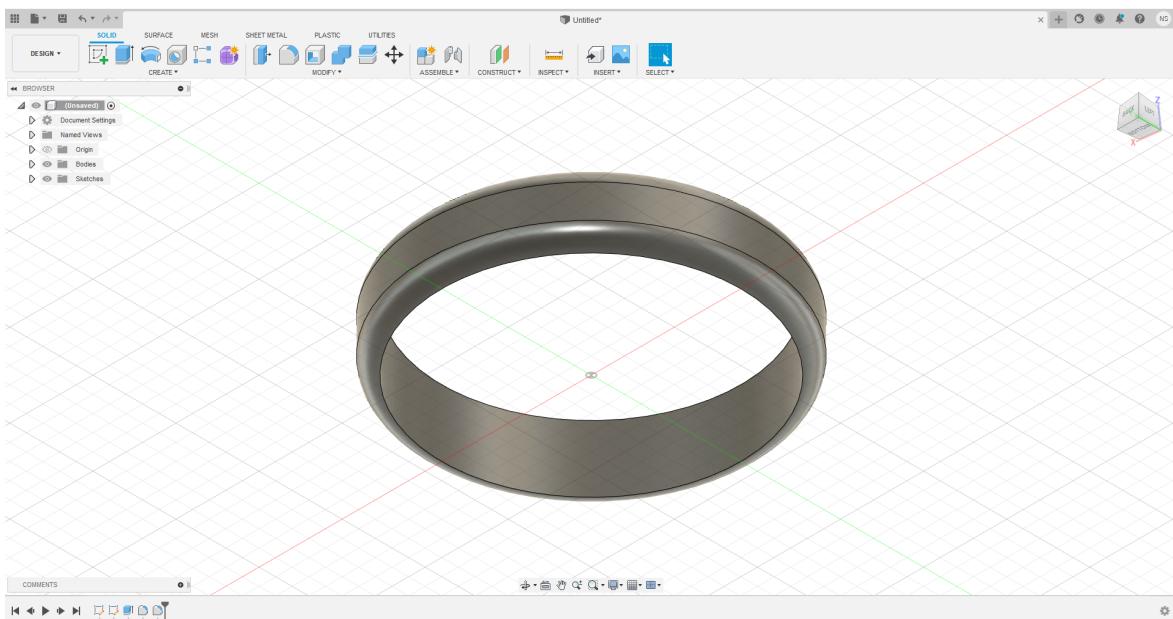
Fusion360 view after bottom edge smoothening by 1 mm fillet
